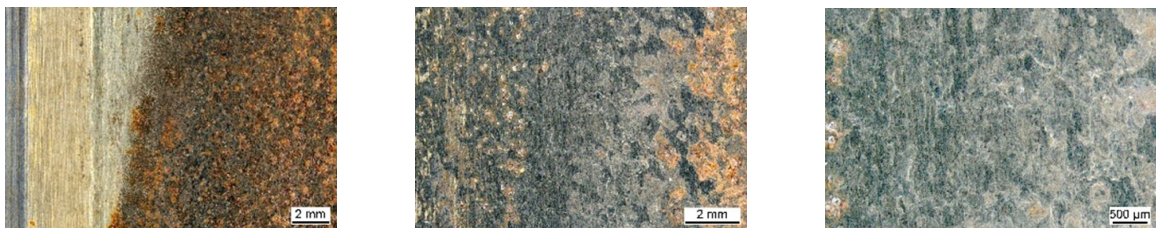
Corroded zone 1, CBK1 zone, in the back side of the corroded bearing.
